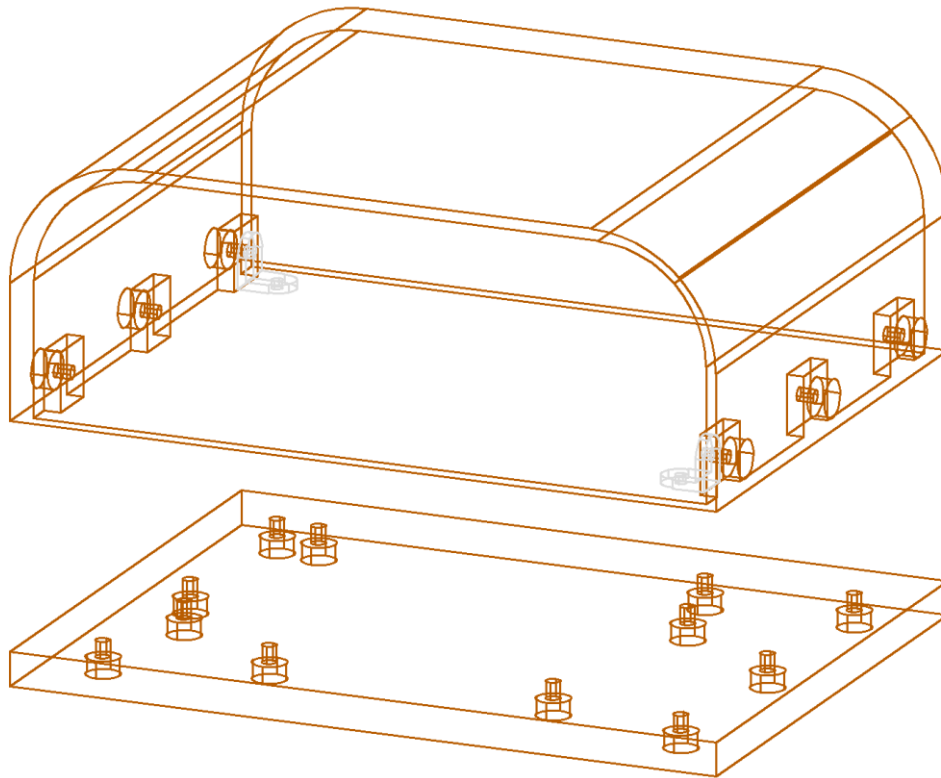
The enclosure top and bottom parts. All internal mounting holes (for enclosure cover and manifold stands).
